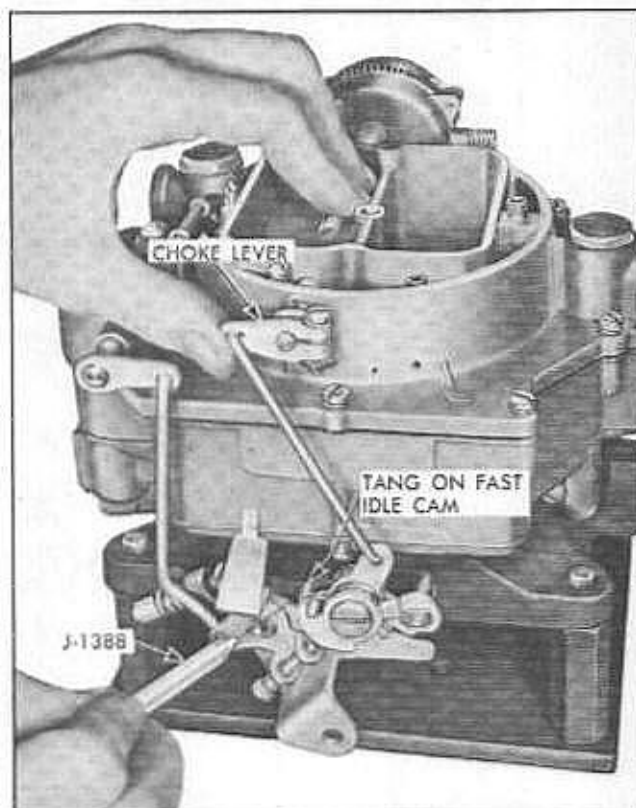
B-32 Fast Idle Cam Clearance Adjustment
